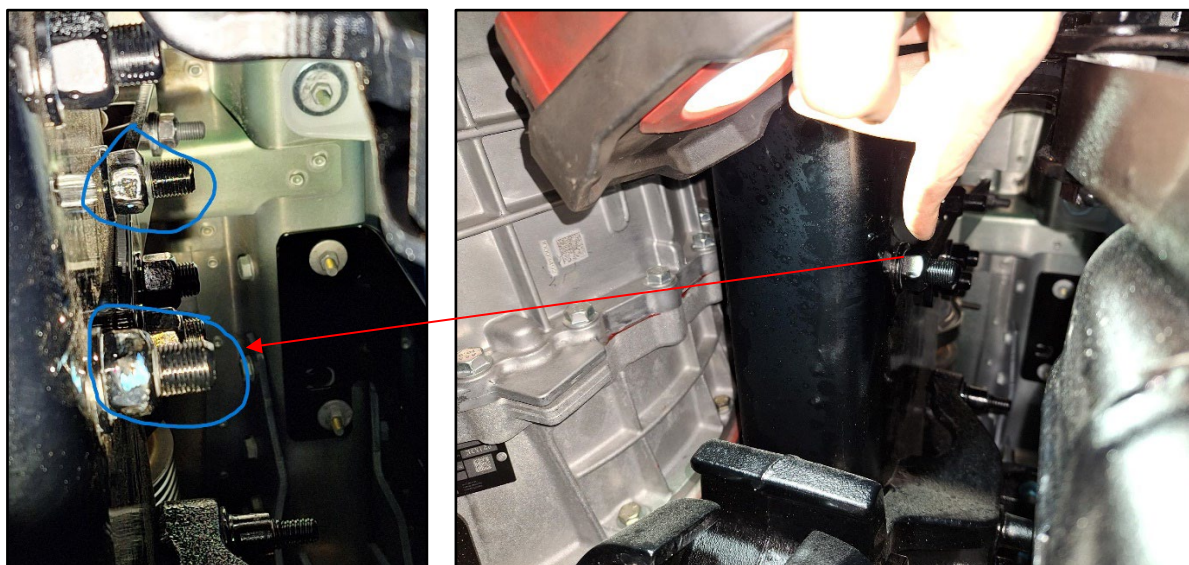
, Loose or Missing Rear Engine Mounting Bolts
